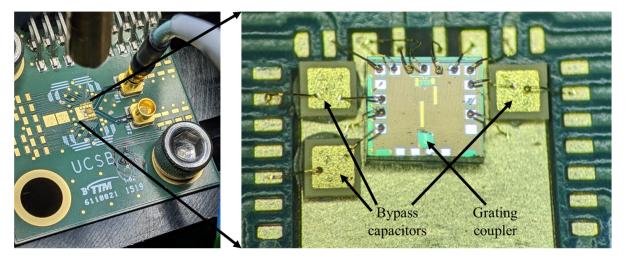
Optical receiver assembly. The optical fiber probe and RF connectors are shown on the left-hand picture. On the right, the wire bonded assembly is shown. Each of the three receiver variants was assembled as shown.
